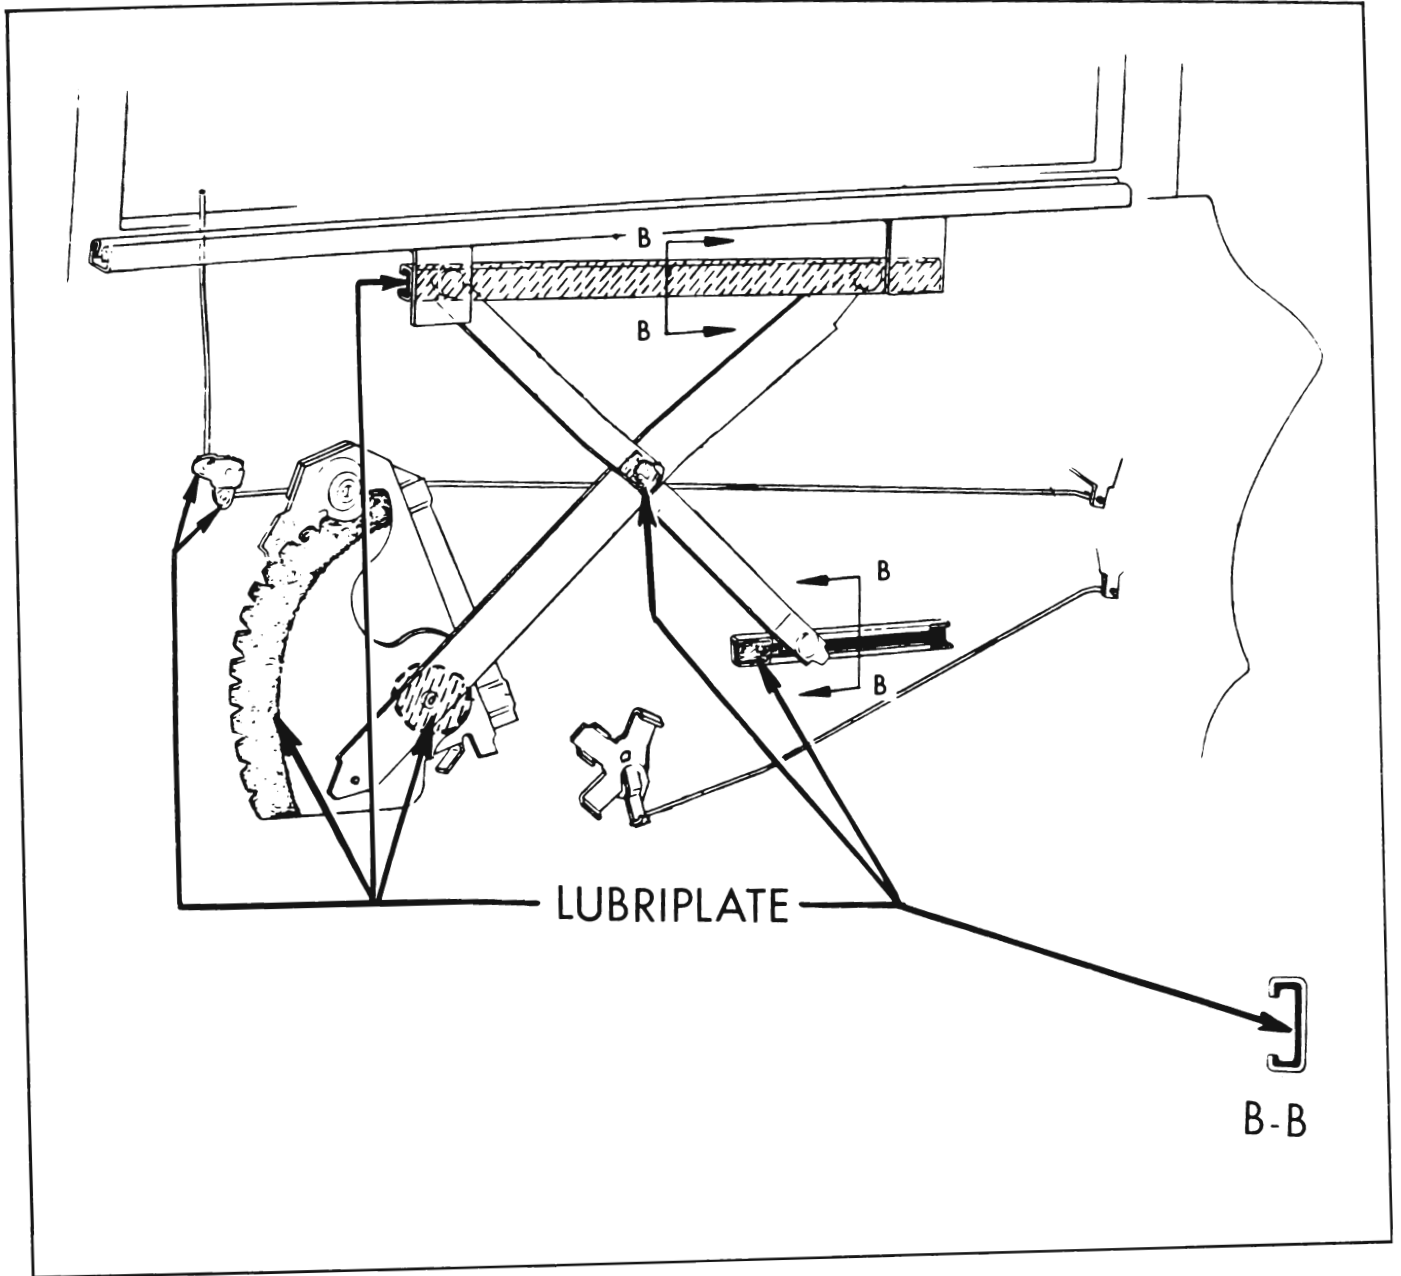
Lubrication of Front and Rear Door Window Regulator, Channels, and Door Lock
